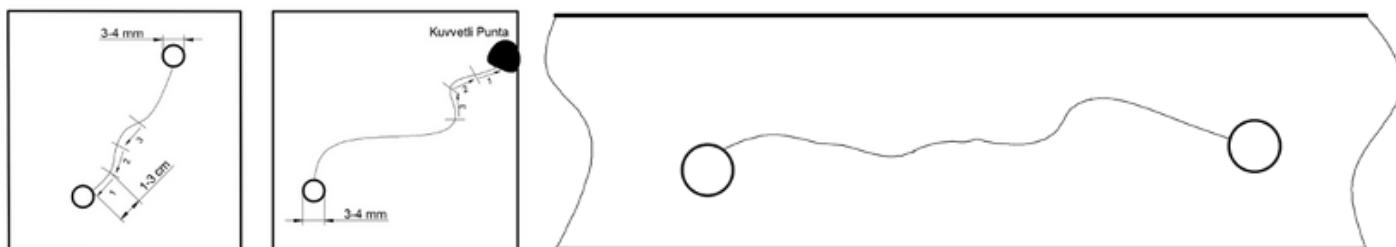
Pass Sequences in Cracked Castings
